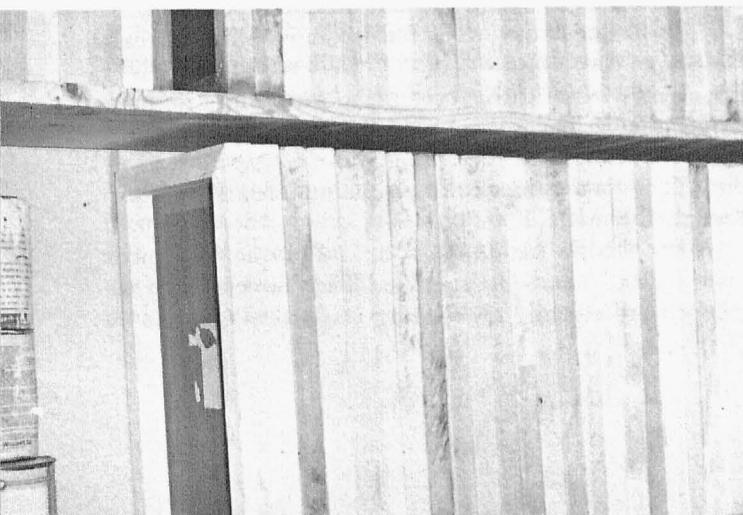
Freshly lacquered plaques set out to dry prior to inspection and packaging.
